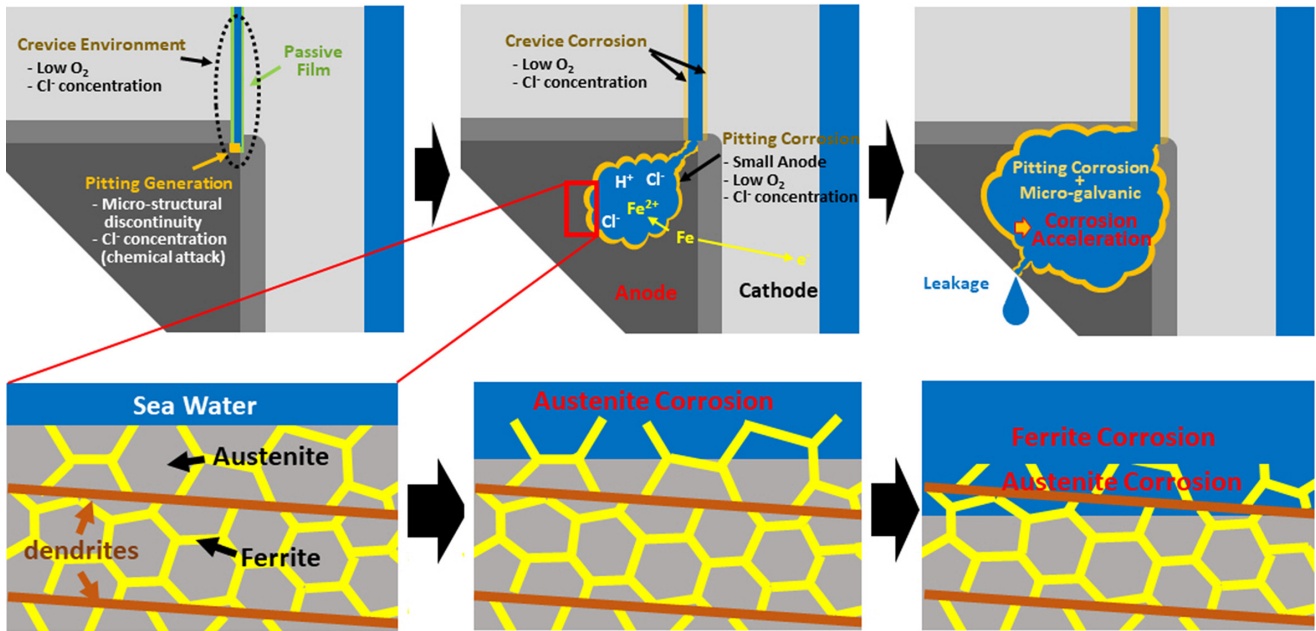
Schematics of corrosion stages in socket weldment.
